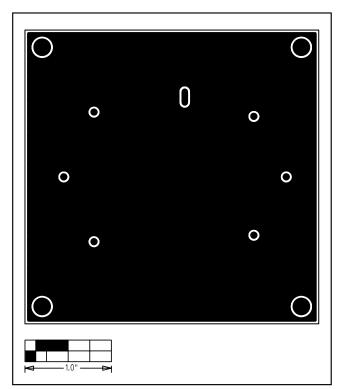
MAX9588 EV Kit PCB Layout—Solder Side
